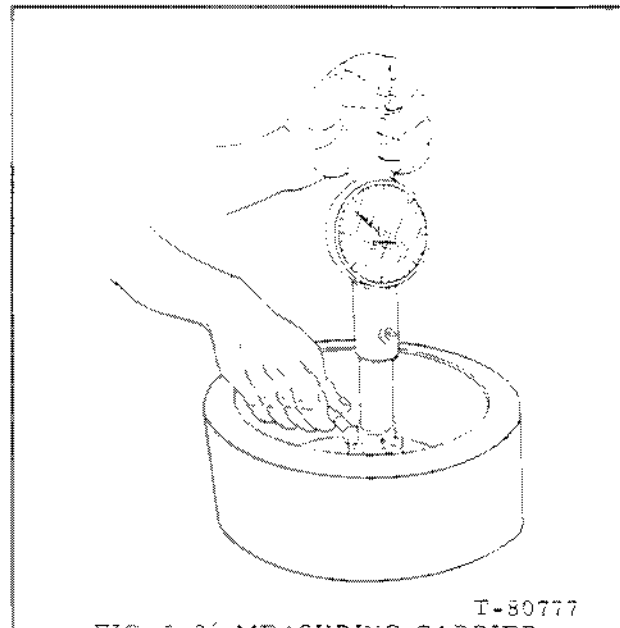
MEASURING CARRIER INNER BEARING CAGE
